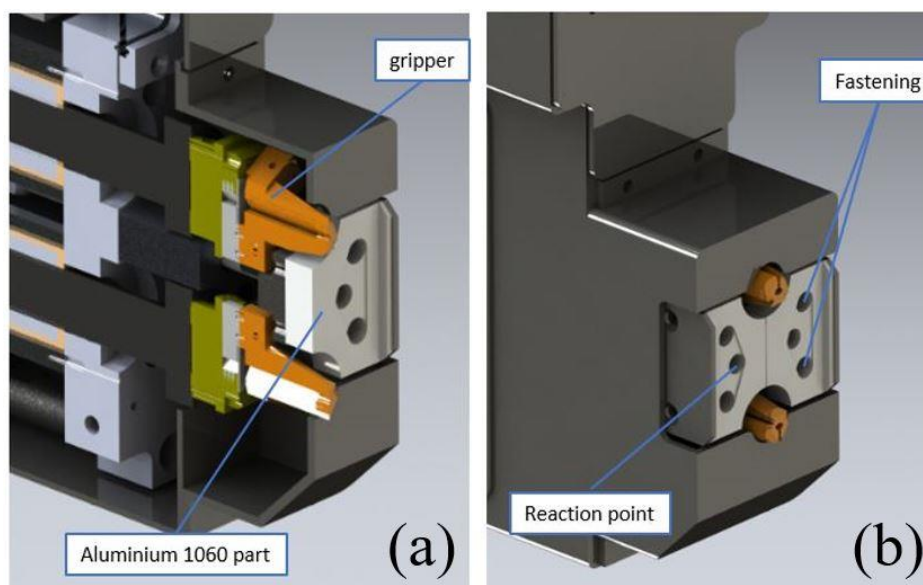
Positioning of parts on the robot tool: (10a) section of tool with gripper systems; (10b) reaction components, area of fastening to the tool, and area behind which the grippers find a reaction.
